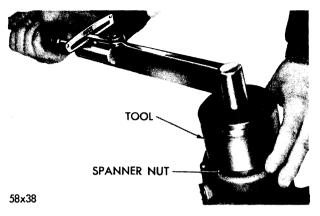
Removing Steering Column Support Nut with Tool C-3634
